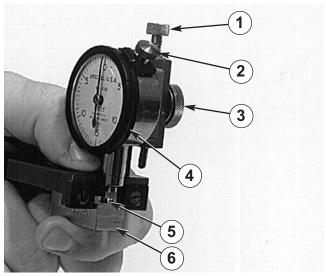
Slice thickness setting gauge. (1) Adjusting Screw, (2) Clamp Screw, (3) Locking Screw, (4) Dial, (5) Gauge Tip, (6) Setting Block
